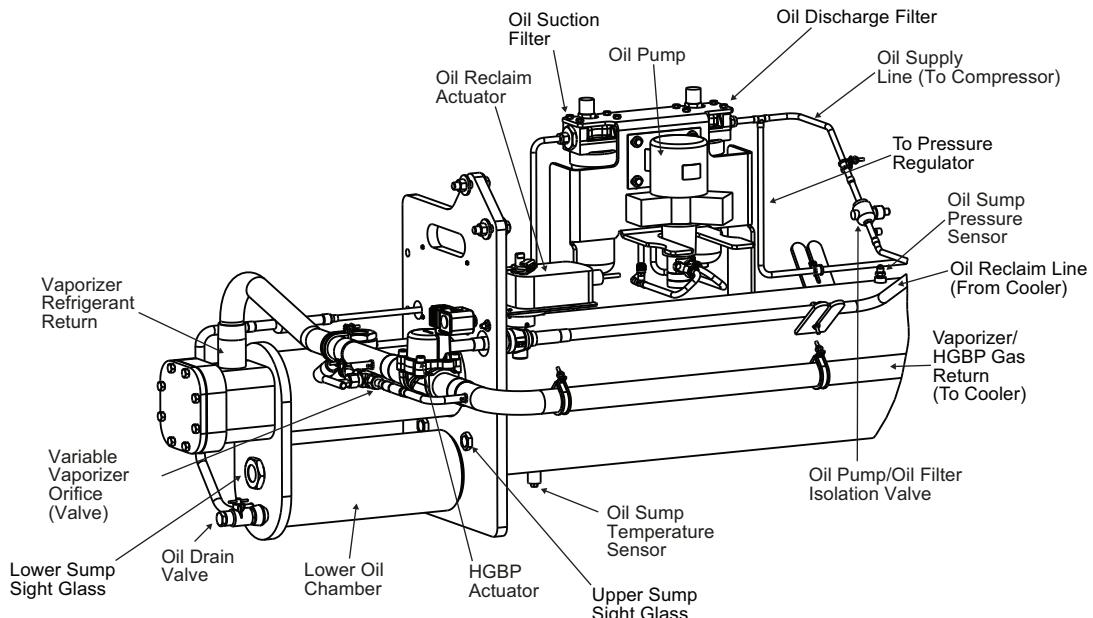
Oil Concentrator Removal, Q and R Compressors (Unit with R Compressor Shown)
